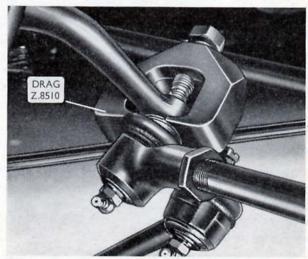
Drag positioned prior to disconnecting the steering connecting rod from the relay lever
